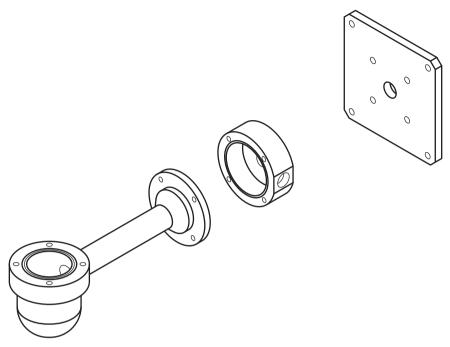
Typical wall mount (from left: Wall Mount Bracket (MIC-WMB), Shallow Conduit Adapter (MIC-SCA), and Spreader Plate (MIC-SPR))
